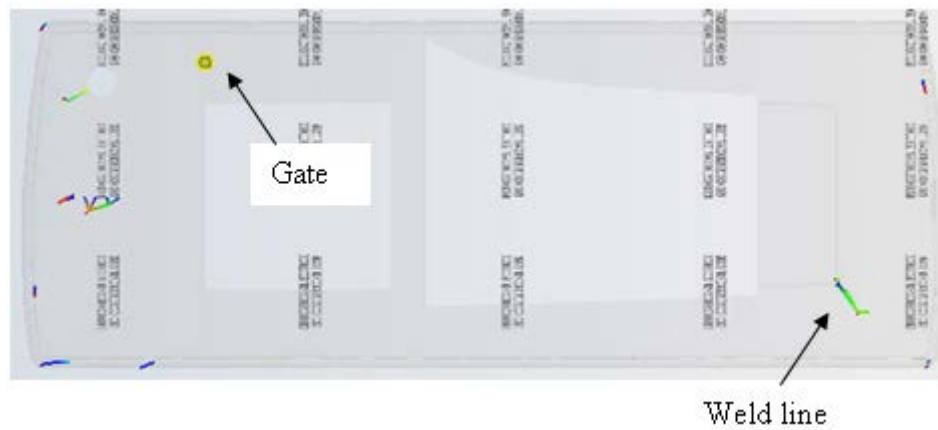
Weld lines produced by one injection gate at location B
